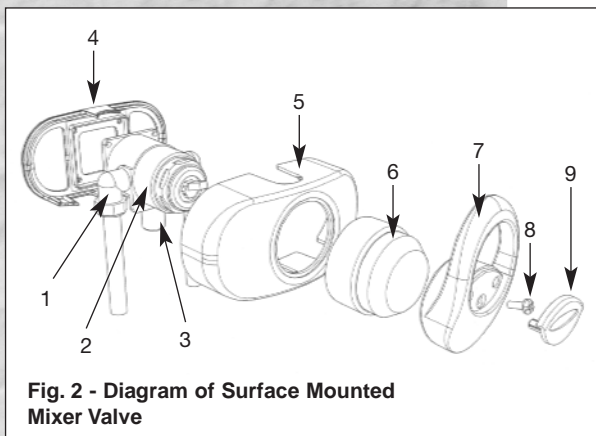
Diagram of Surface Mounted Mixer Valve
